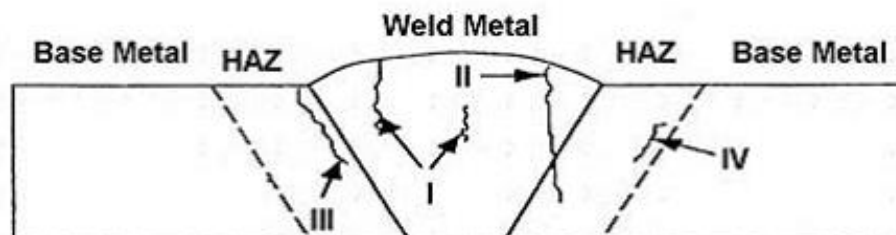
Classification of cracks in a weld joint (Schuller 1974).
